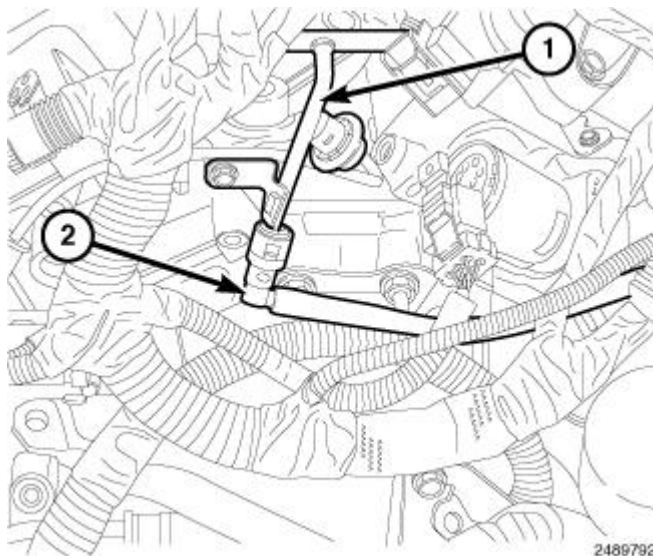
Locating Fuel Supply Hose & Fuel Rail
